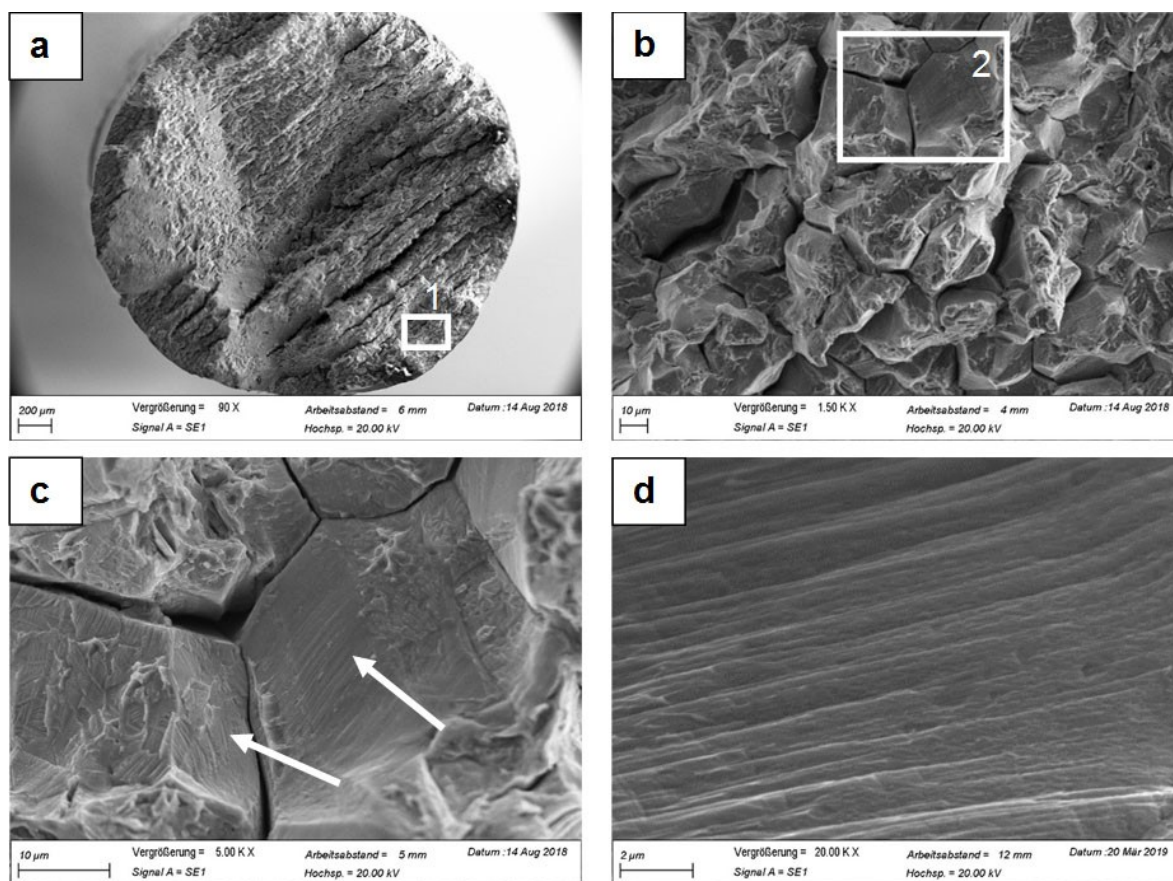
Tensile specimen tested in H_2 (10 MPa, RT). a) Overview of the fracture surface. b) Detail 1 showing predominantly intergranular fracture. c) Detail 2 showing slip traces on the facets. d) Higher magnification of slip traces on facets.
